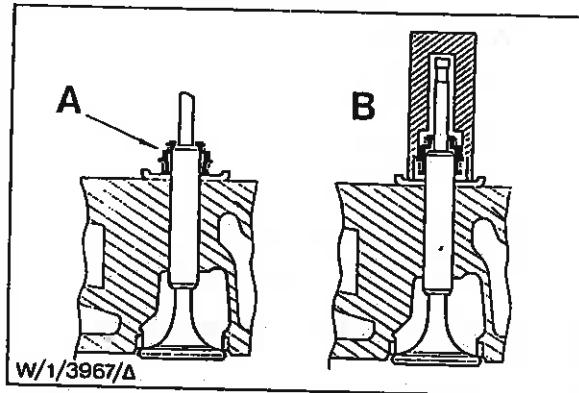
Fitting Inlet Valve Stem Seals on Naturally Aspirated Engines
